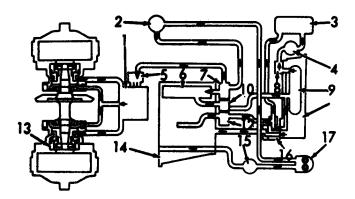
transmission, bevel gear, and steering clutch oil system.
